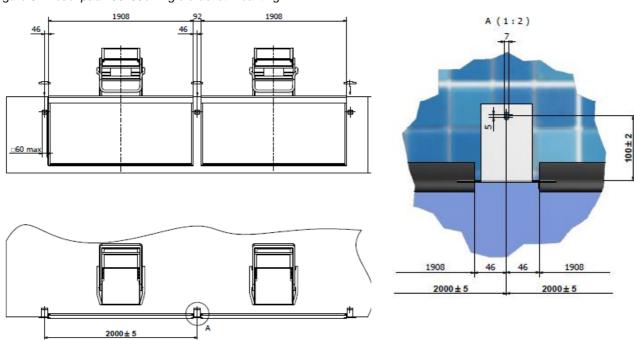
Touchpad 190x90 / Angle bracket mounting
